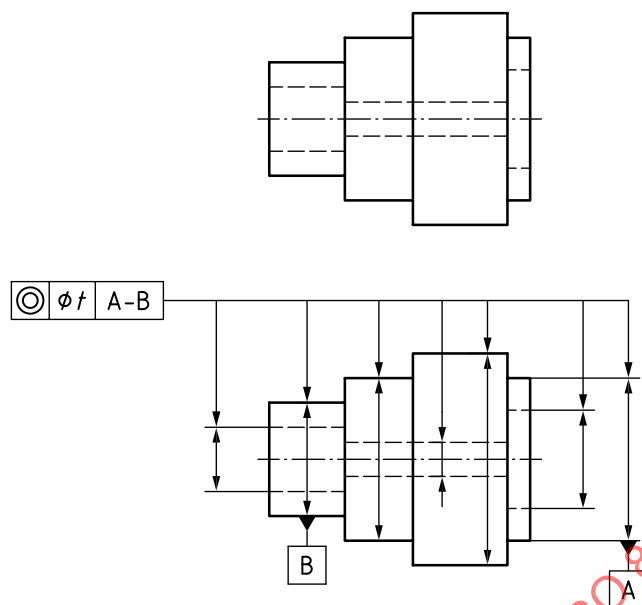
Drawing and meaning of general coaxiality tolerances, common datum with the largest diameter (in this case the outer cylinder)
